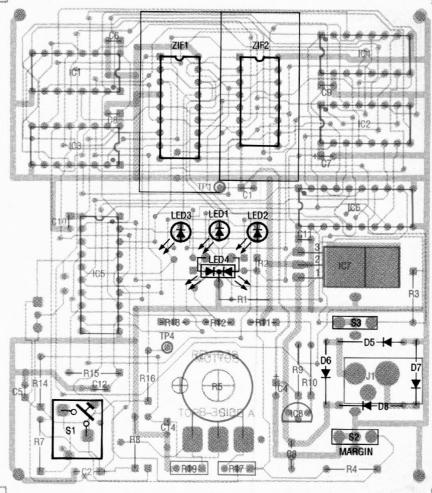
PARTS-PLACEMENT DIAGRAM. The parts shown in color are installed on the "bottom," or solder side of the board—that is, the side opposite that with the ZIF sockets.
